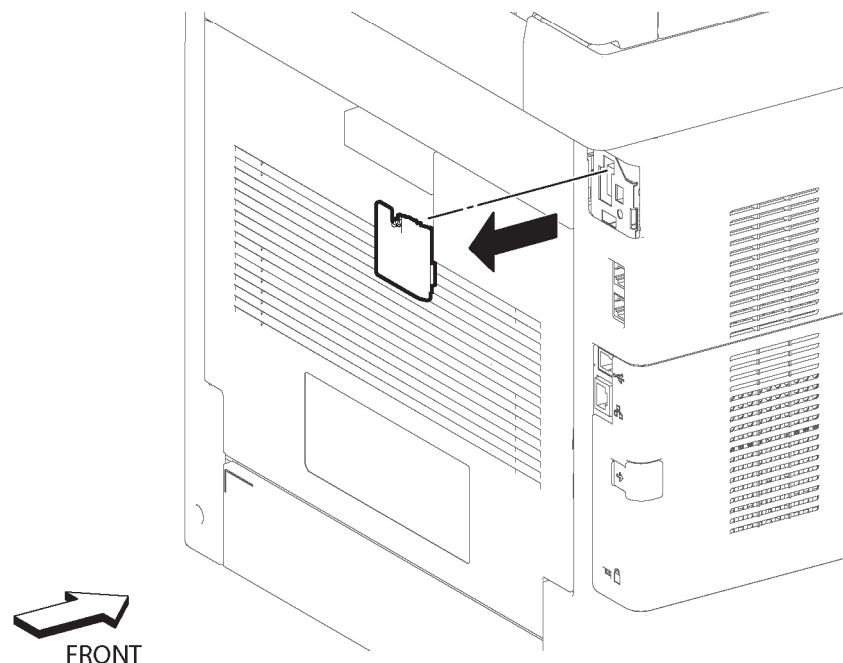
Remove the Second Bias Transfer Roller Assembly (MFP)
